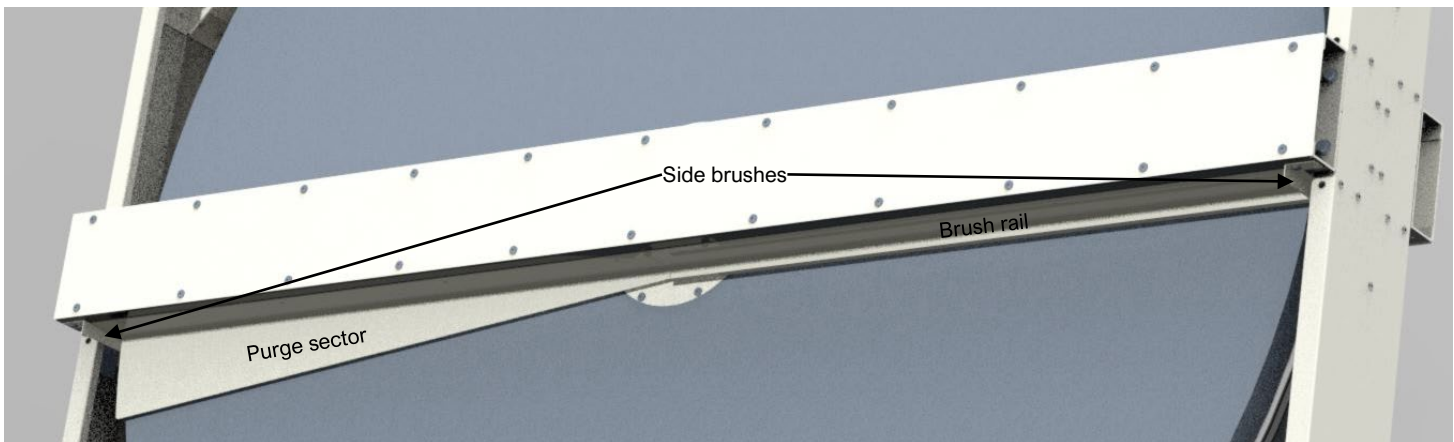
Purge sector, brush rail and side brushes installed under the wheel supporting beam
